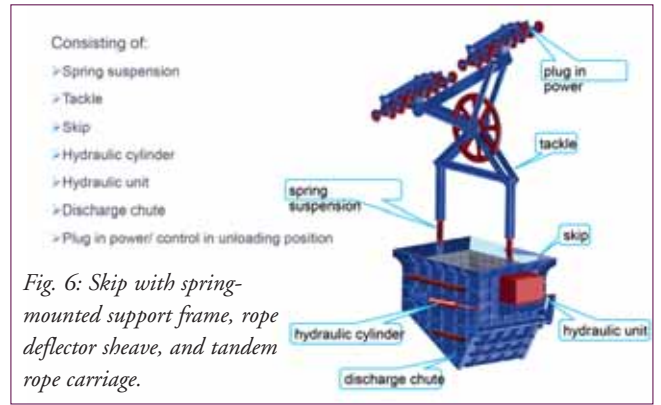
Skip with spring-mounted support frame, rope deflector sheave, and tandem rope carriage.
